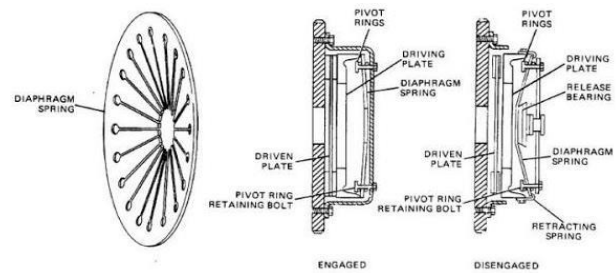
The Diaphragm spring used in Clutch Assembly
